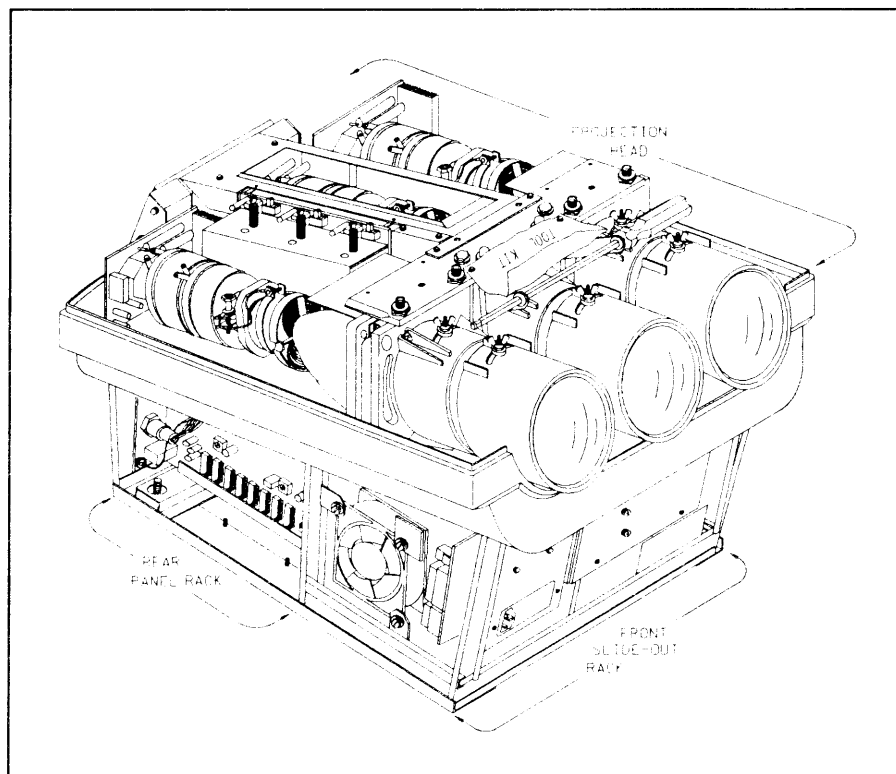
Projector Module and Component Areas (covers removed)
